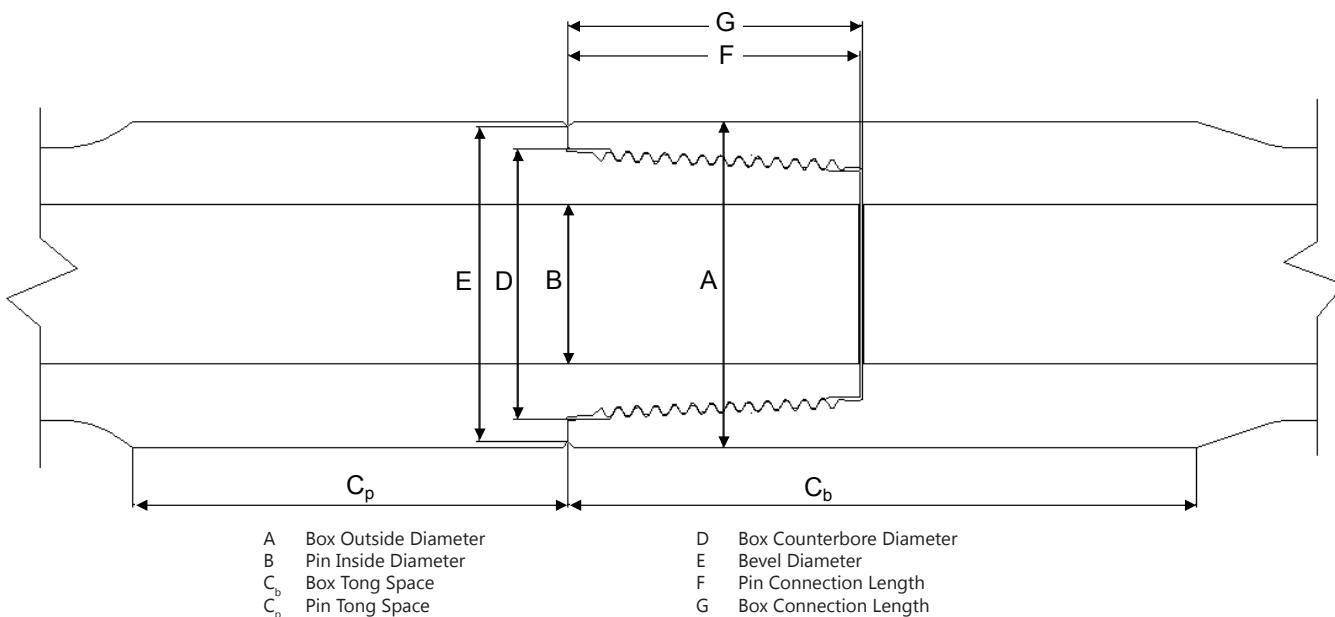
Tool joint dimensions for Hilong HLIDS, HLMT, HLST, and HLIST connections.
